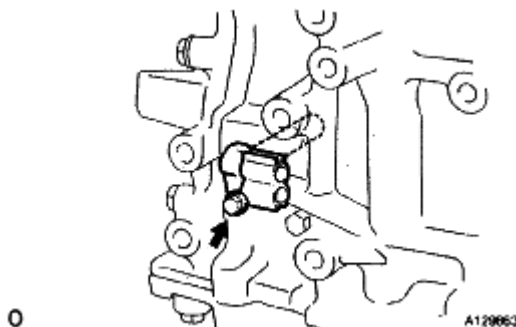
Identifying Crankshaft Position Sensor Bolt
